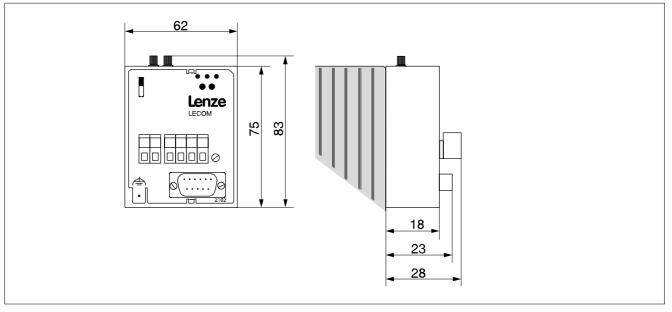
Dimensions of the 2102 fieldbus module (all dimensions in mm)
